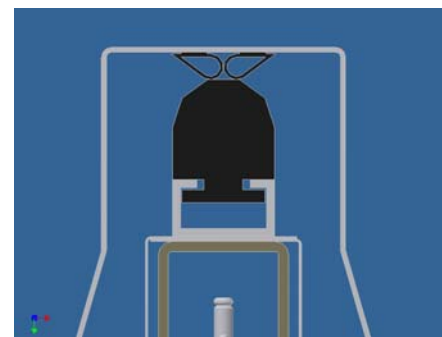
Properly Positioned Edge Pieces with Sensing Edge
